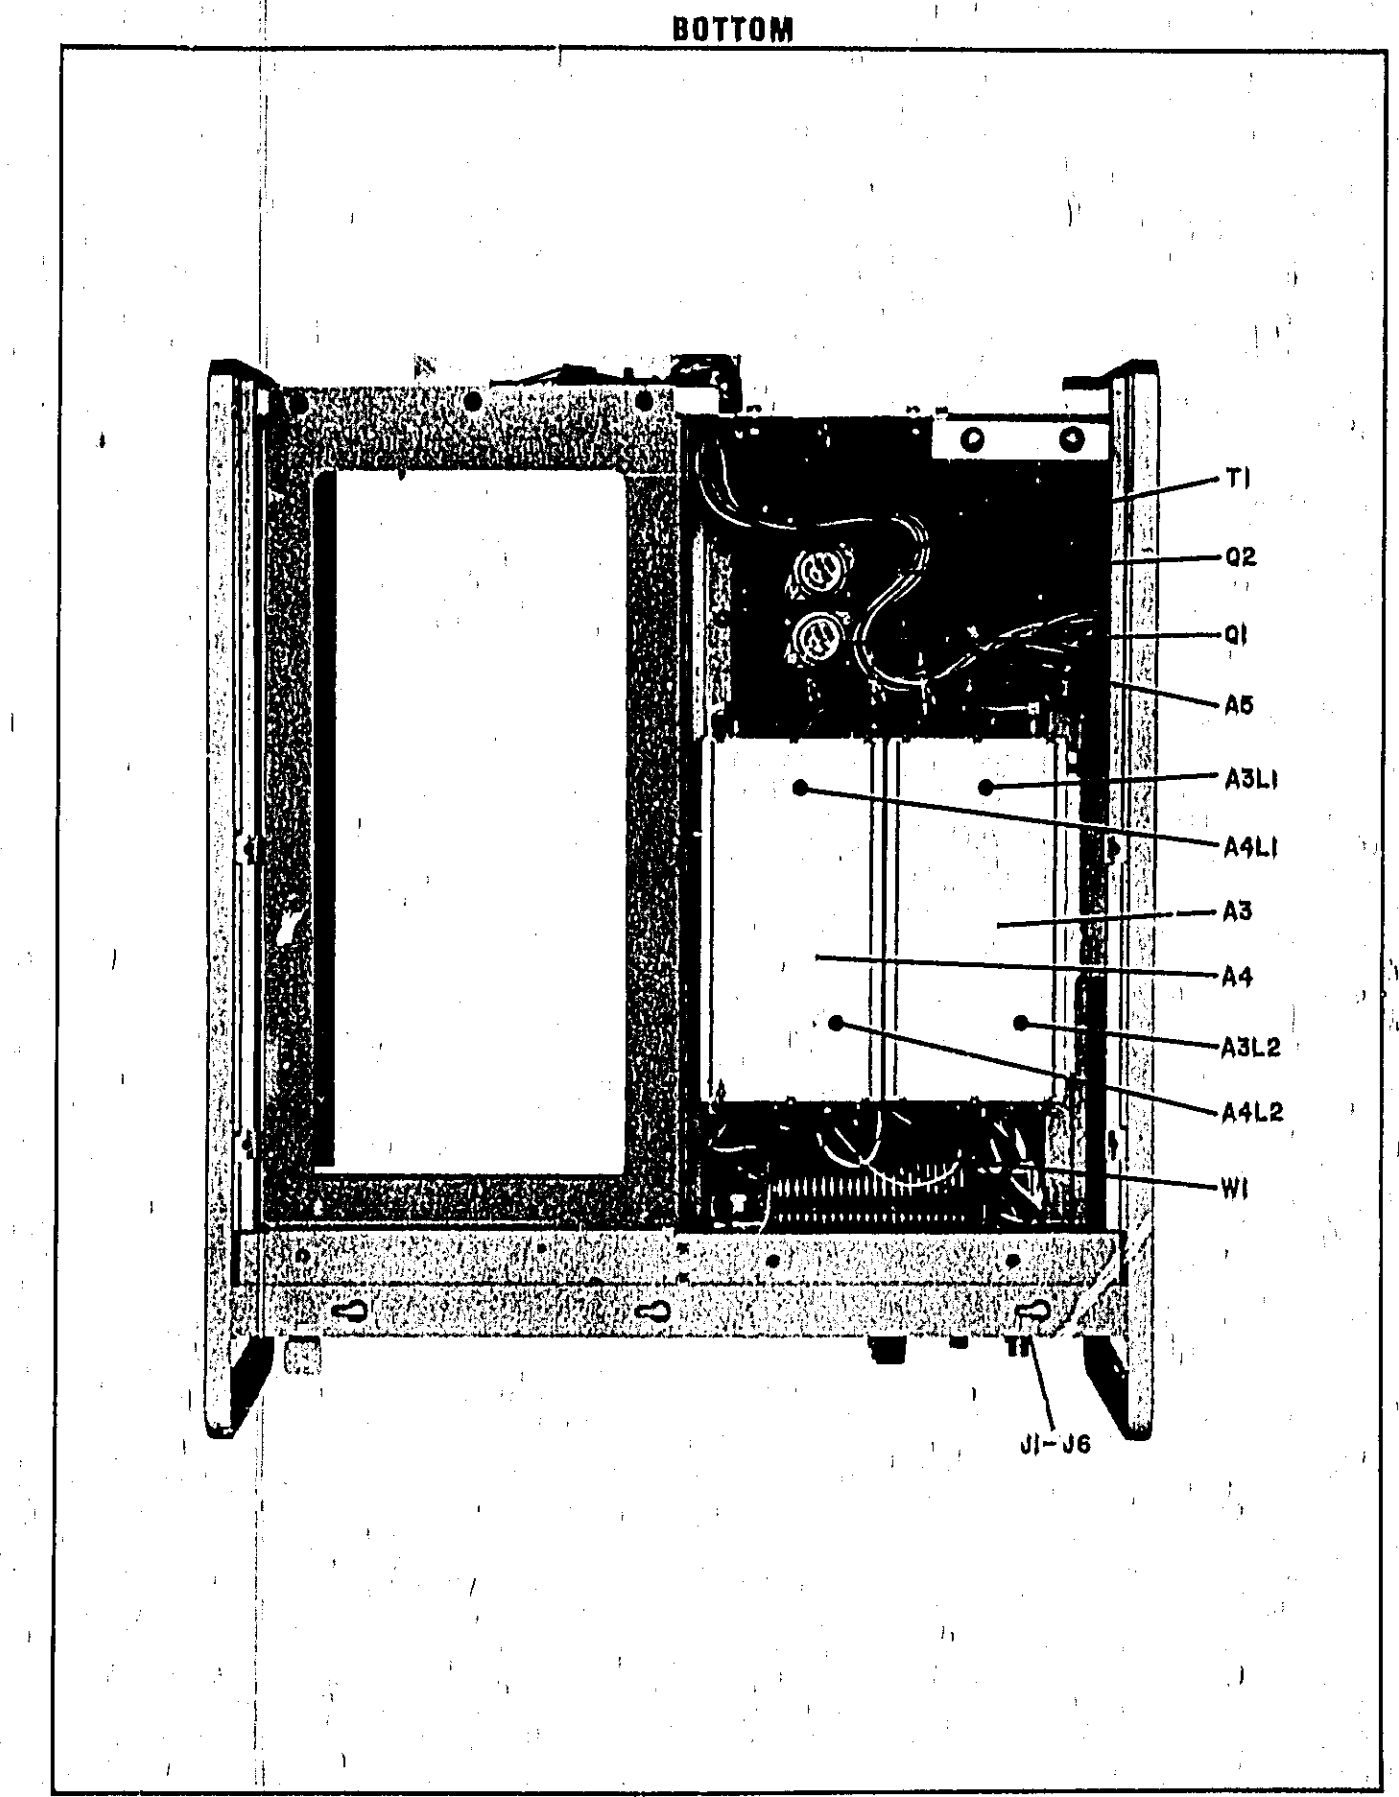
Location of Major Assemblies and Adjustment Points (2 of 2)
